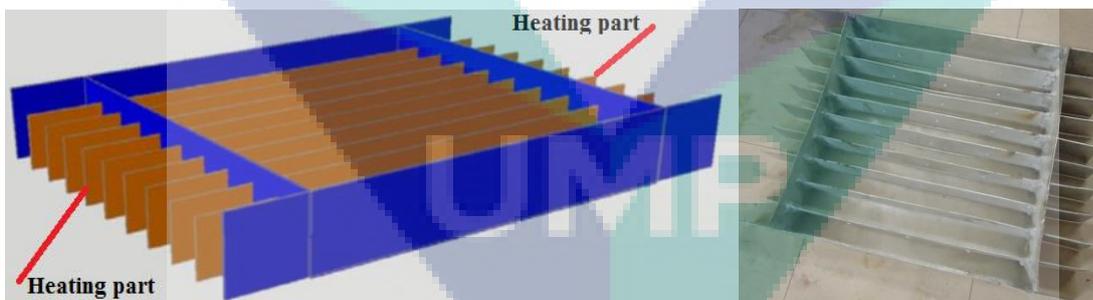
Aluminium fins inserted and welded to the storage.
